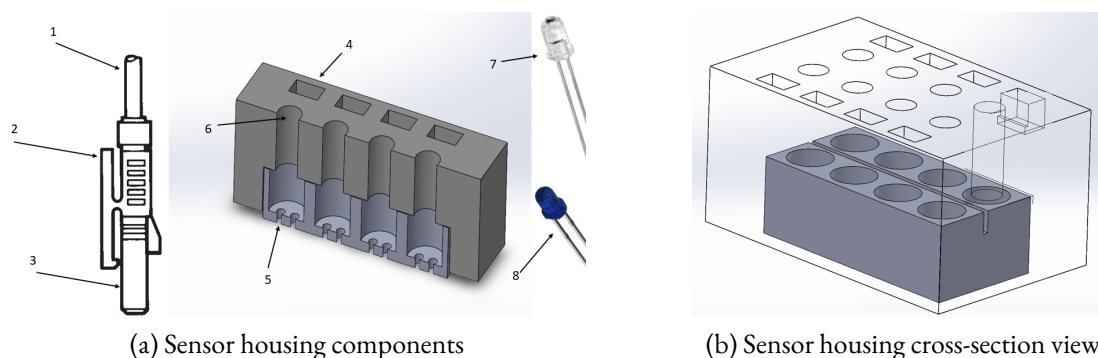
Sensor housing design. In order: 1. Simplex latching cable output; 2. Latching mechanism; 3. optical cable input; 4. latching location; 5. space for cathode and anode of photo-interrupter and LED; 6. optical cable input location in sensor housing; 7. LED; 8. photo-interrupter
